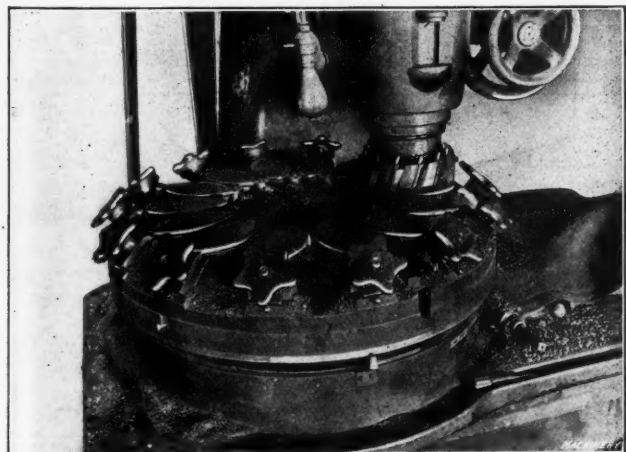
Continuous Rotary Milling Fixture used on the Becker Vertical Milling Machines for holding the Sad Iron Bases while machining
